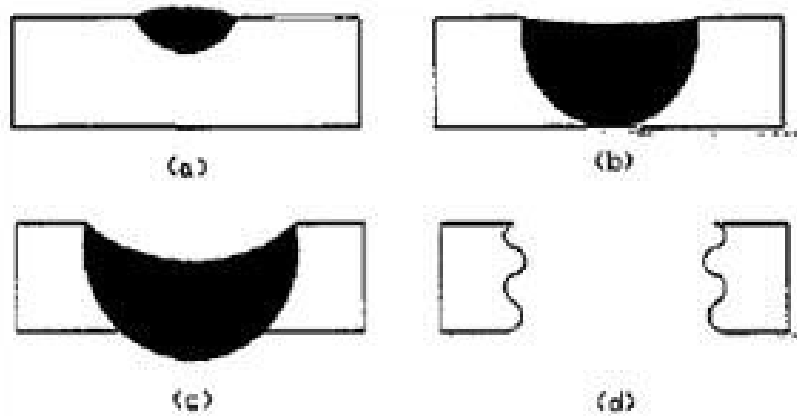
Weld depth penetration; (a) unpenetrated, (b) penetrated, (c) over penetrated, (d) burn-through [85,86]
